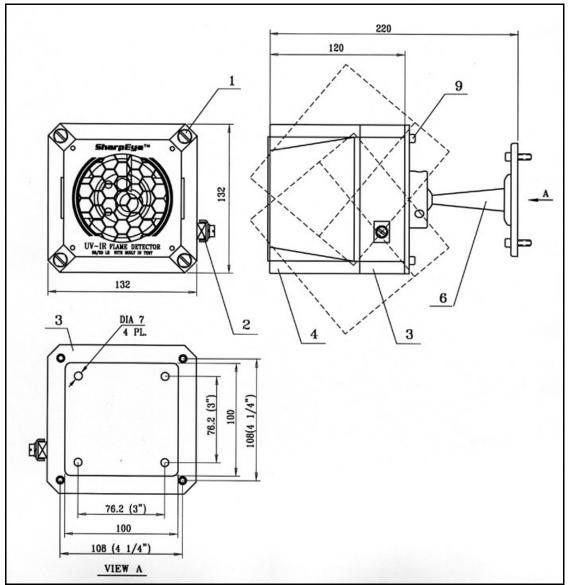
a. U/IR Detector and Swivel Mount Assembly
